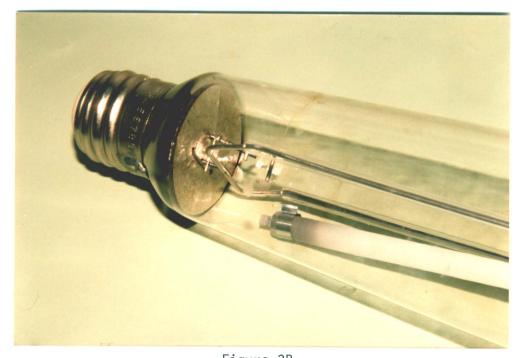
B Lamp Arc Tube Support Failure At Base End (Double Arc Tube Support)
